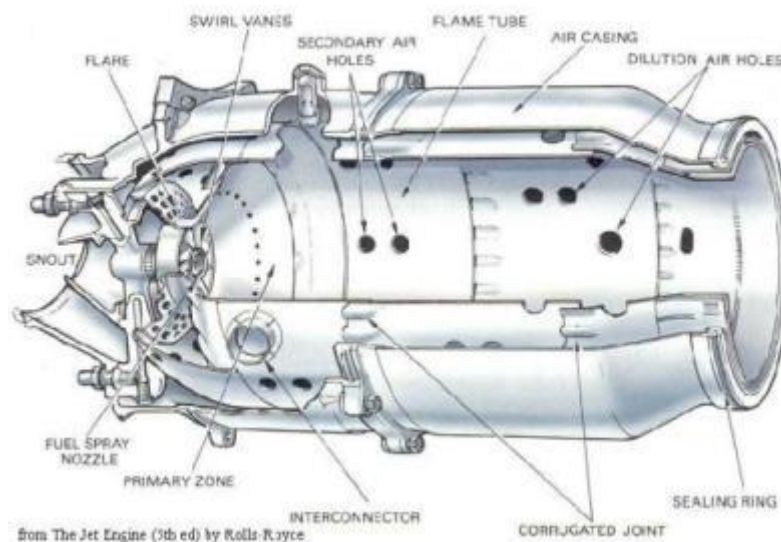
Cut-section view of a combustor in conventional combustion chamber [21]
